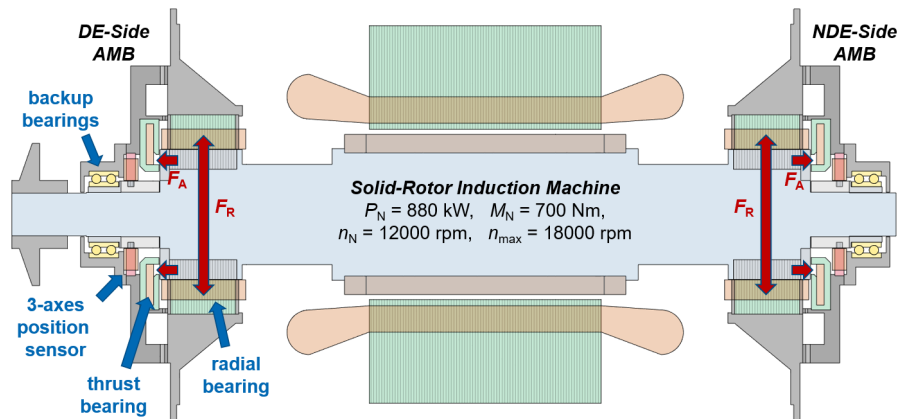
Design concept for rotor and active magnetic bearings with two identical AMB cassettes for simple assembly, including splitted thrust bearing, solid-rotor induction motor
